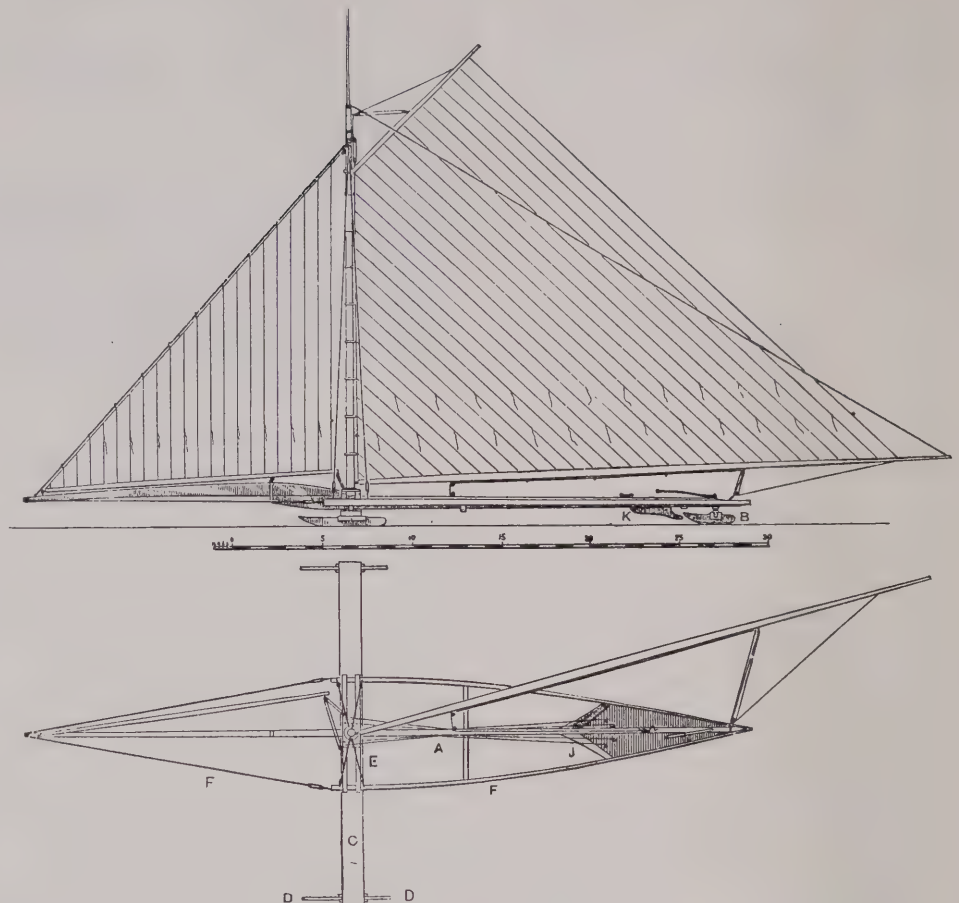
PLAN AND ELEVATION OF AN ICE-YACHT.
